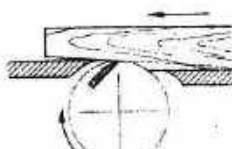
OUTFEED TABLE SLIGHTLY TOO HIGH
